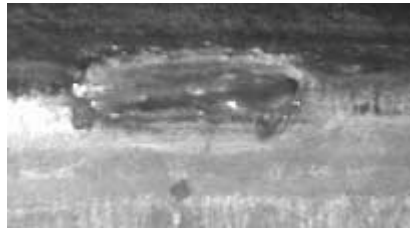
Complete shear failure of a flare-bevel weld
